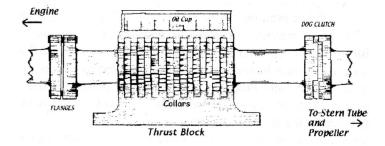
An illustration derived from a similar design in Paasch (1890) showing a section of propeller shaft, flanges, a multicollared thrust block, and a dog clutch (M. McCarthy).
